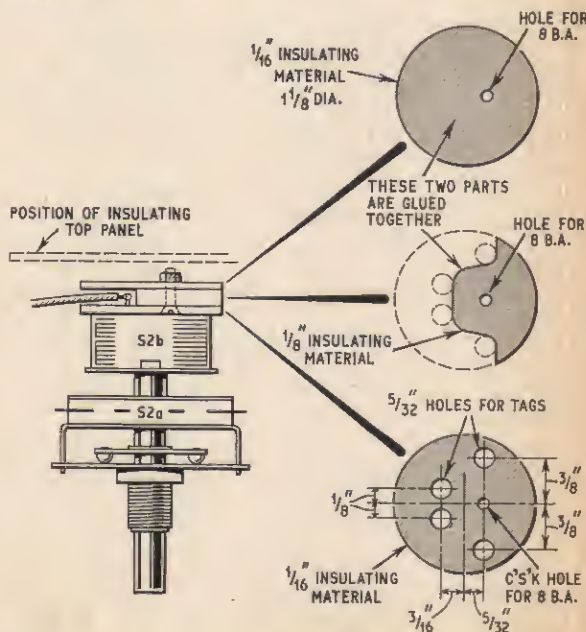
Insulated cover for S2b. The lower section with the screw in position should be fitted before the wiring is connected to the switch
